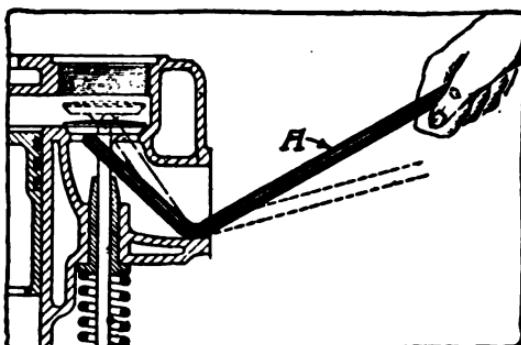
Bent Tool Which Facilitates Removal of Stuck Valves
